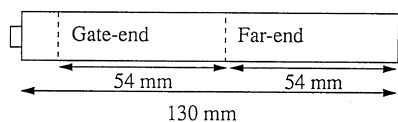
Schematic of injection molded fracture bar indicating gate and far end fracture specimens; thicknesses of 3.18 mm and 6.35 mm were used.
